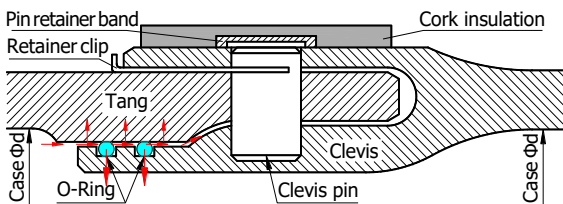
O-ring seals causing Space Shuttle Challenger Disaster
